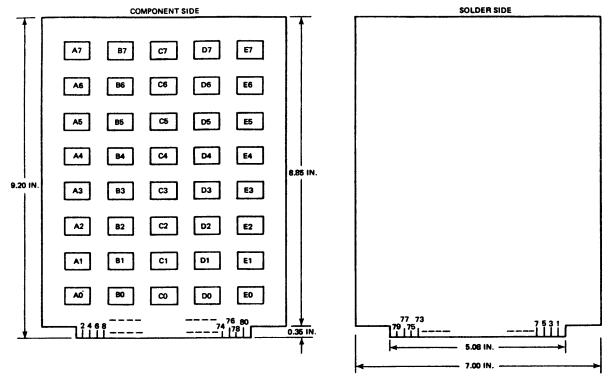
Single Connector Type 1 PC Board Physical Configuration
